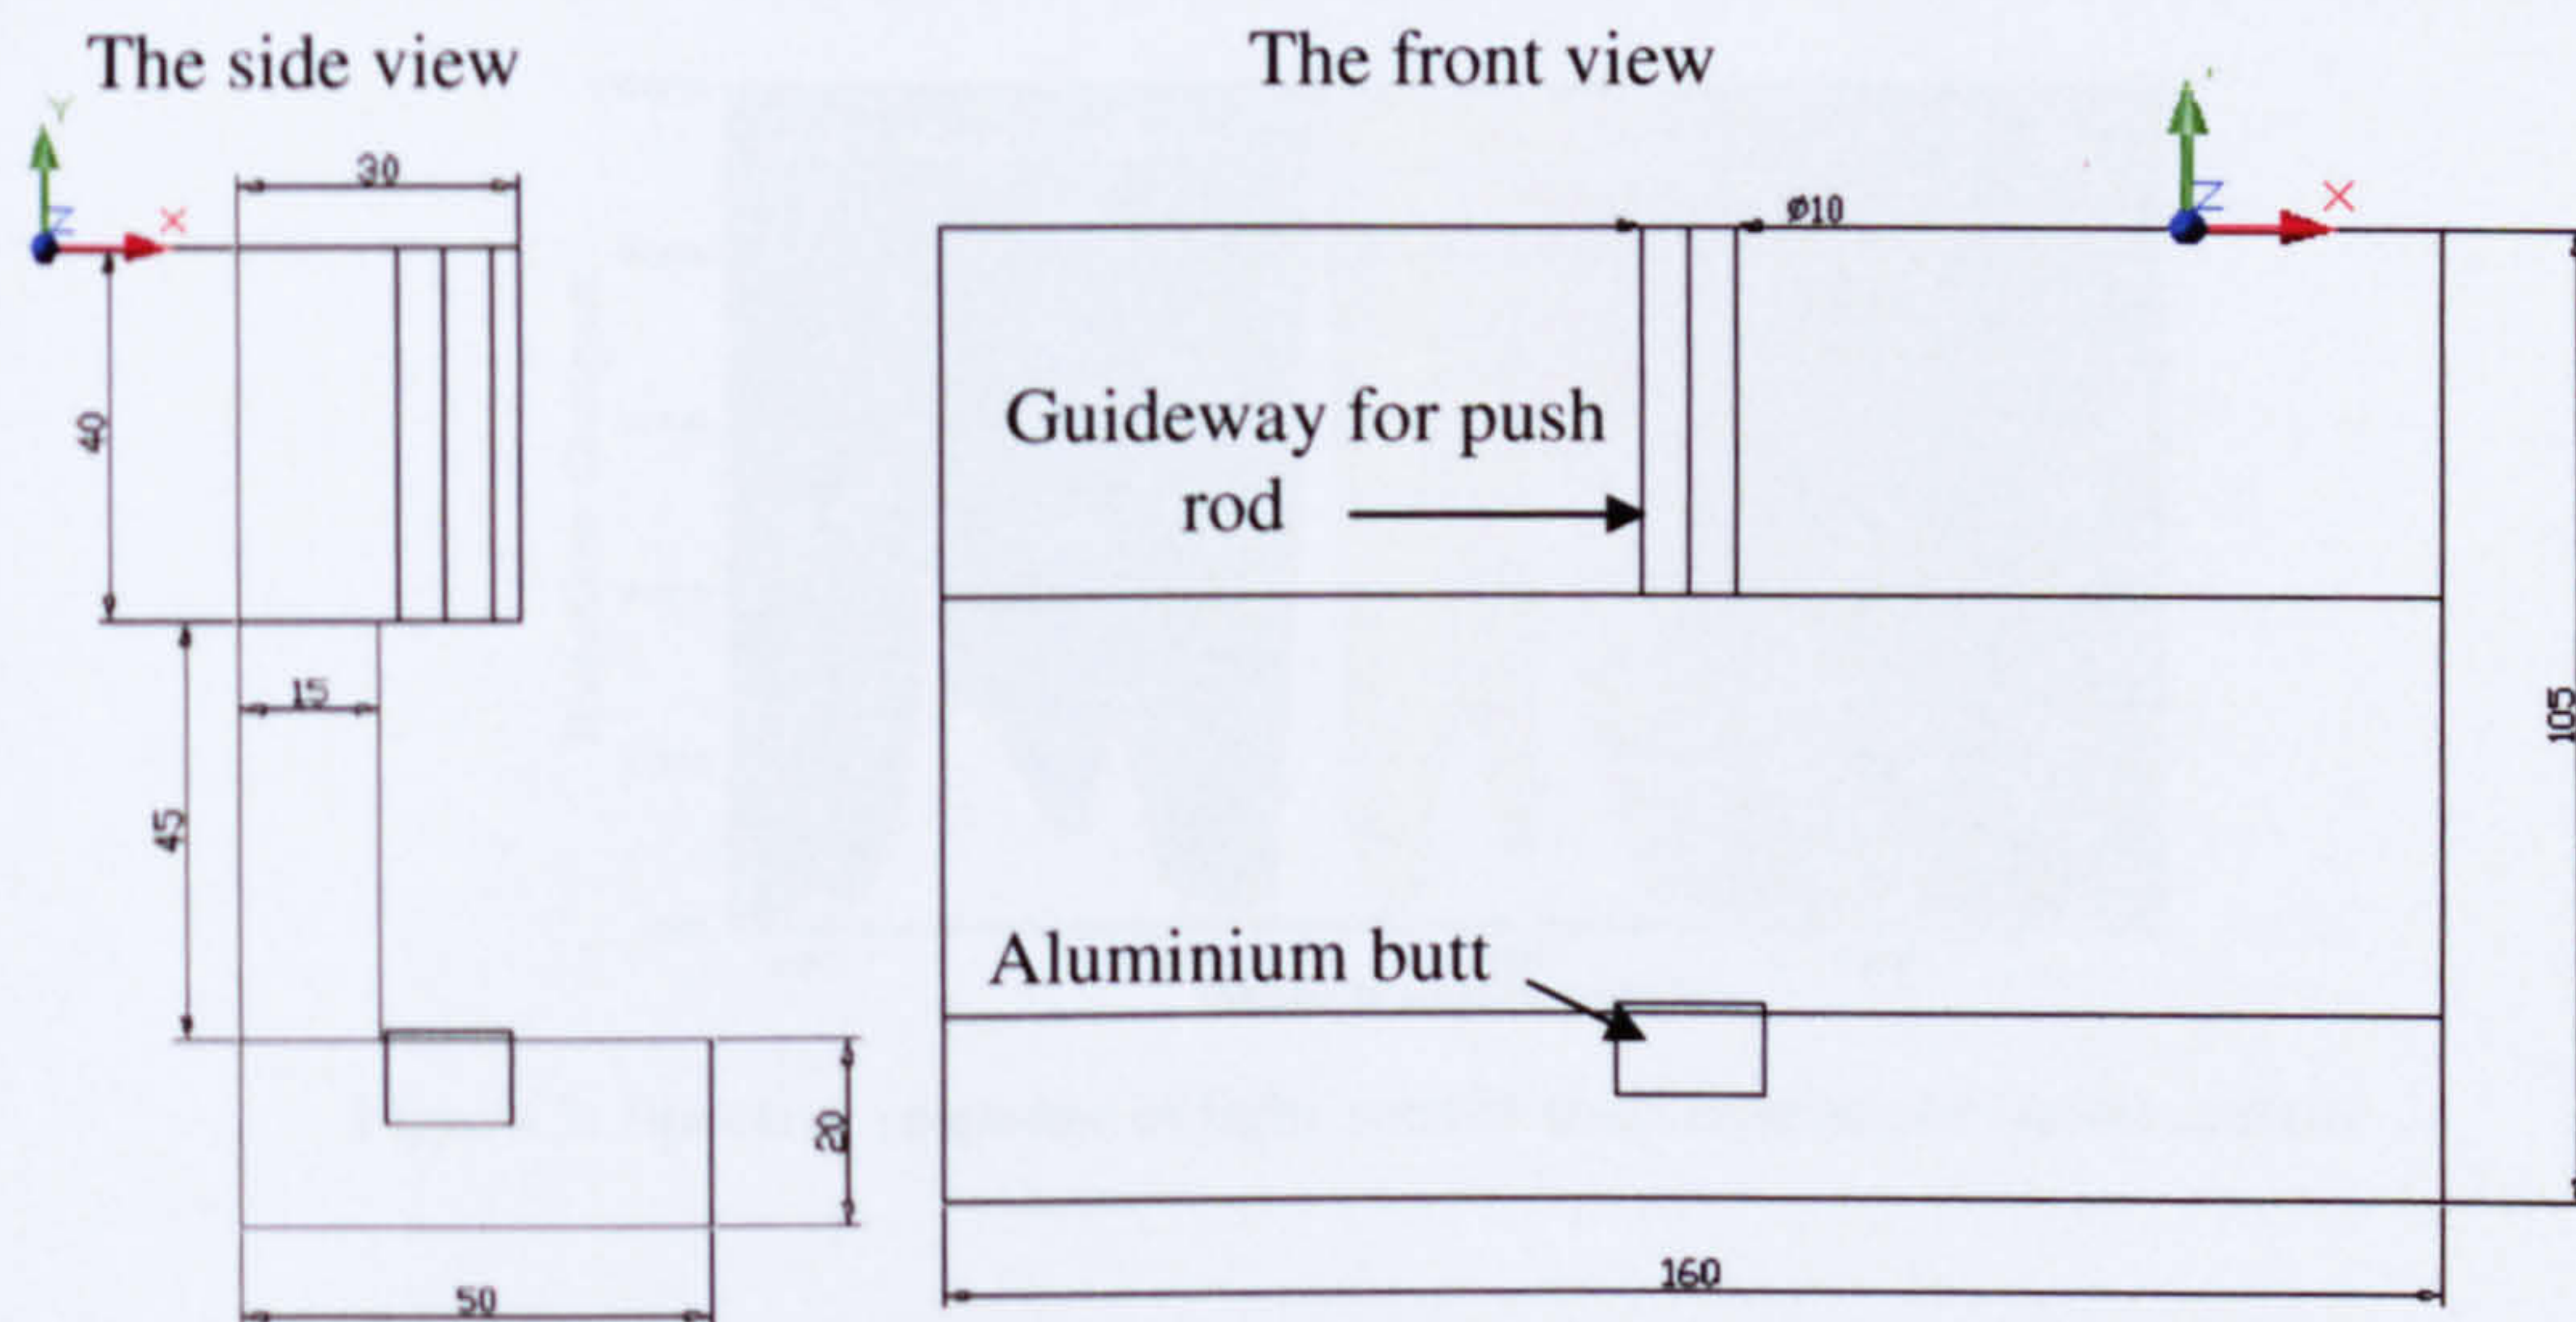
The Disc Loading setup (a) the side view, (b) the front view with dimensions in mm
